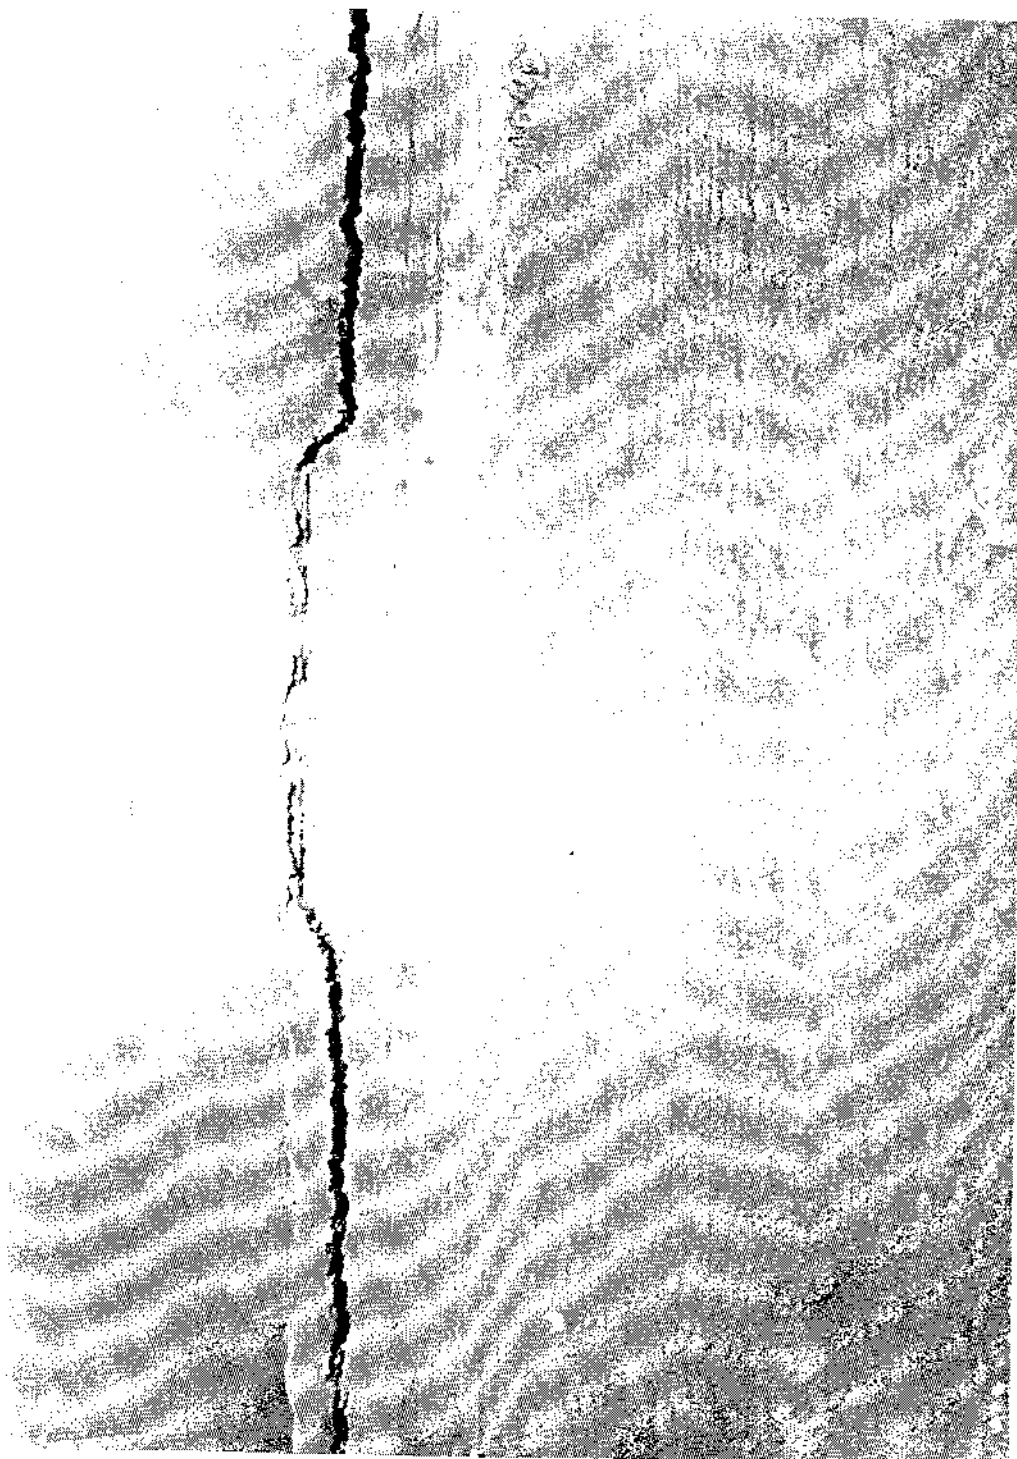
Exterior view of broken weld of HK cast-alloy tube.
